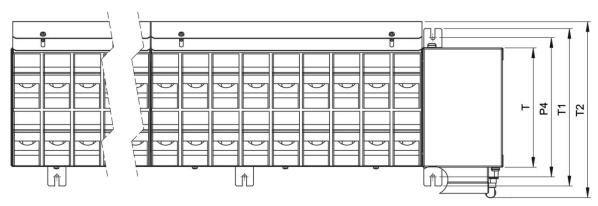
Technical drawing NKBD.../3.1 dimensions
